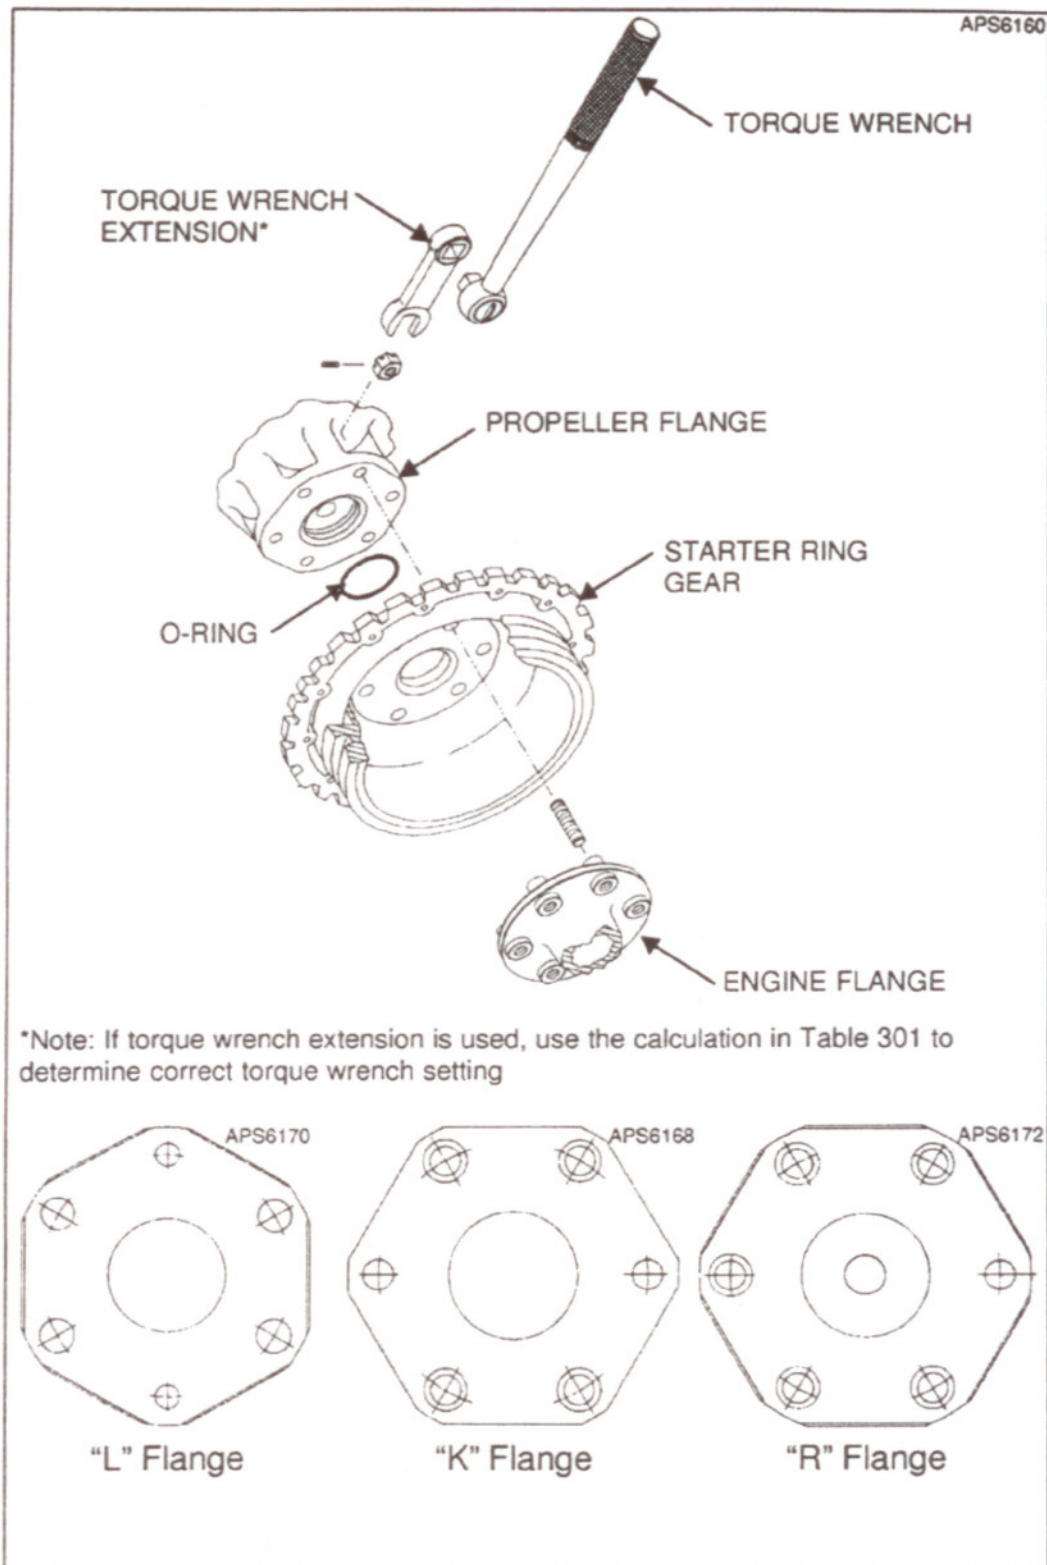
"L," "K," and "R" Flange Propeller Mounting
